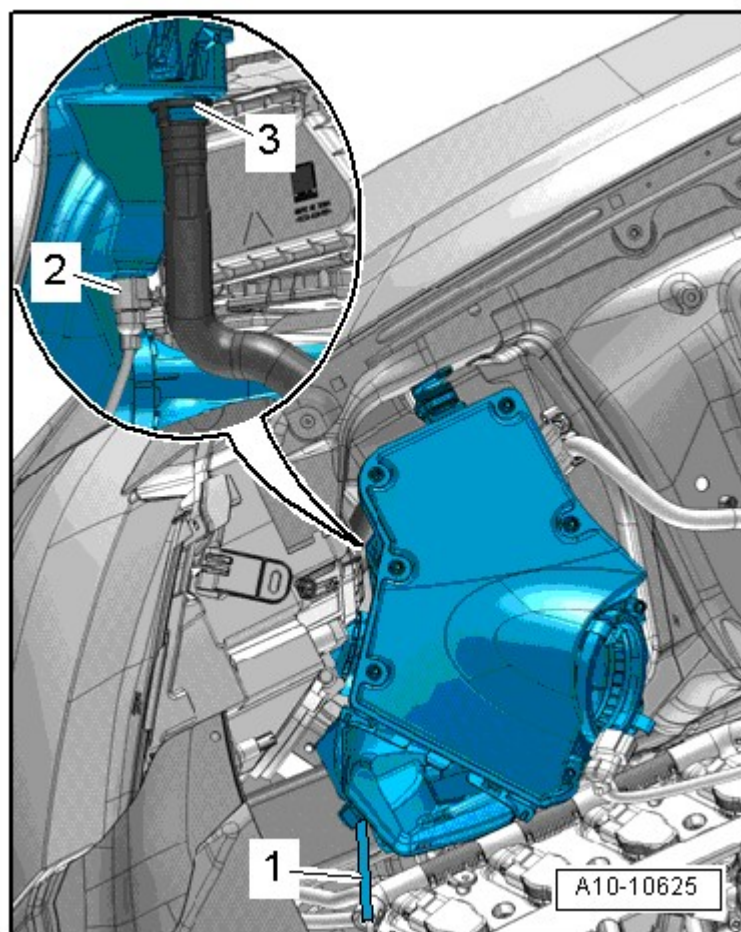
Intake Air Switch-Over Valve -N335- -2-
